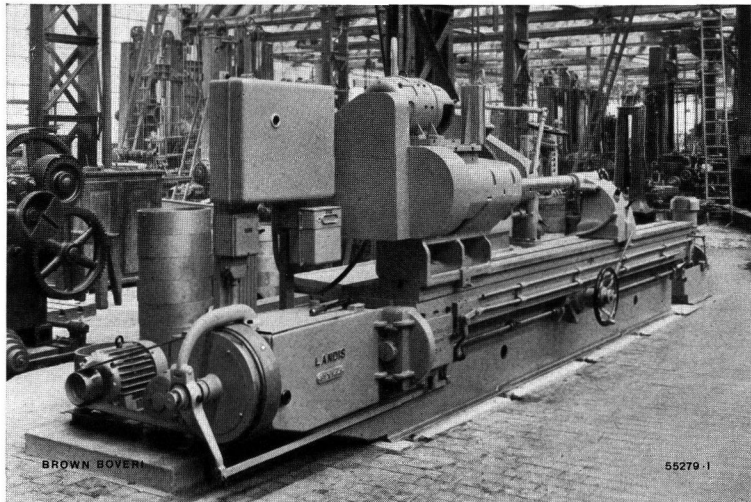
Landis cylindrical grinding machine after modernization of drive, i. e., substitution of five individual drives for lineshaft drive, a d. c. Ward-Leonard-controlled drive being employed for automatically adjusting the speed to the diameter of the work.
